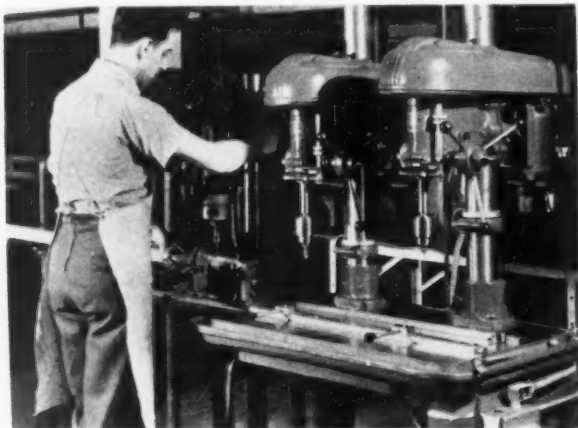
Special drilling and indexing fixture which permits the drilling of holes within .02 inch.
